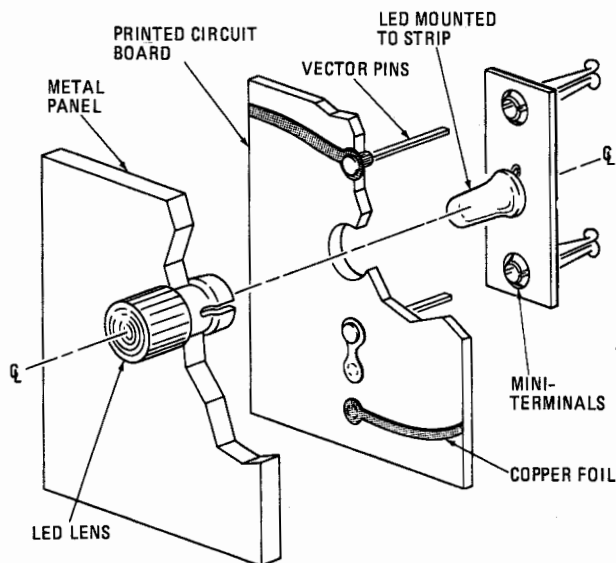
LED LENS ON THE FRONT PANEL mates with the PC board and the LED on its mounting strip.
